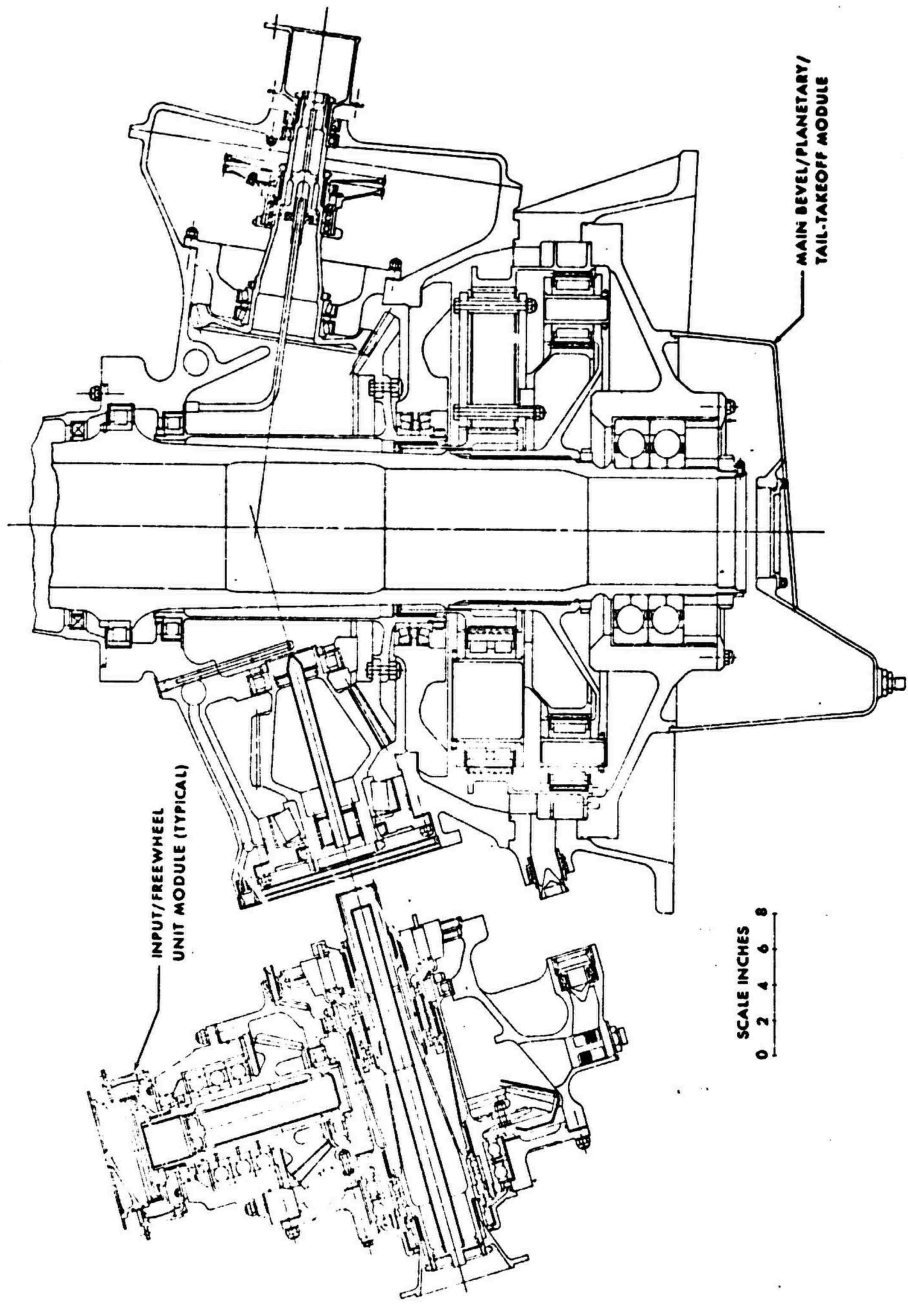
Exploded Cross Section of CH-54B Main Transmission, Three-Module Configuration.
